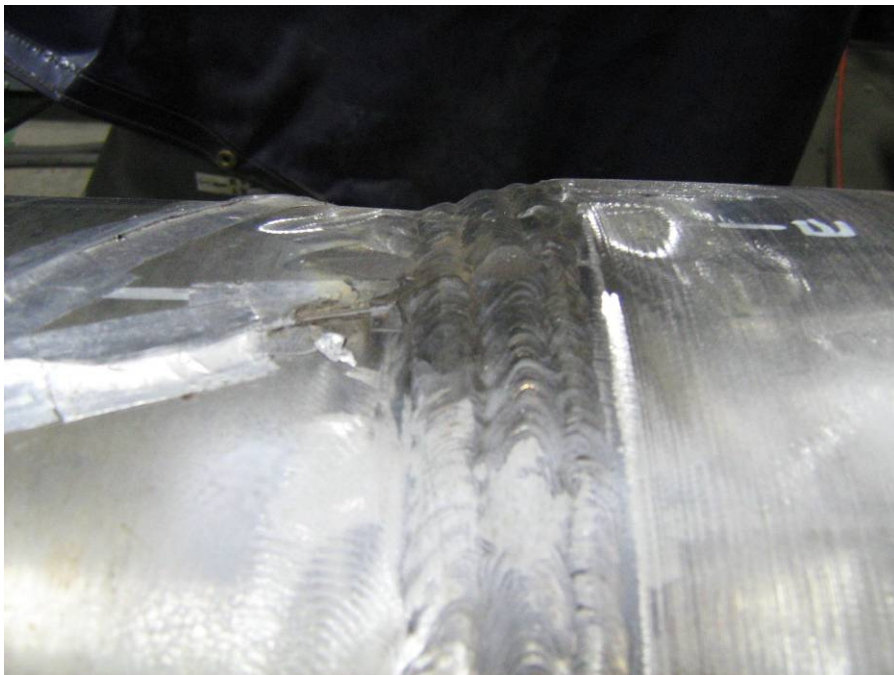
Photograph of the Completed WOM Safe End to Stainless Pipe Weld
